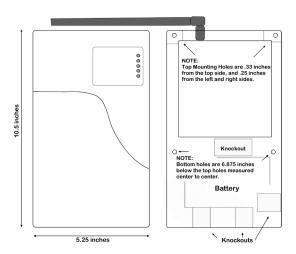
Inside & Outside Mounting Dimensions for the CDMA30
